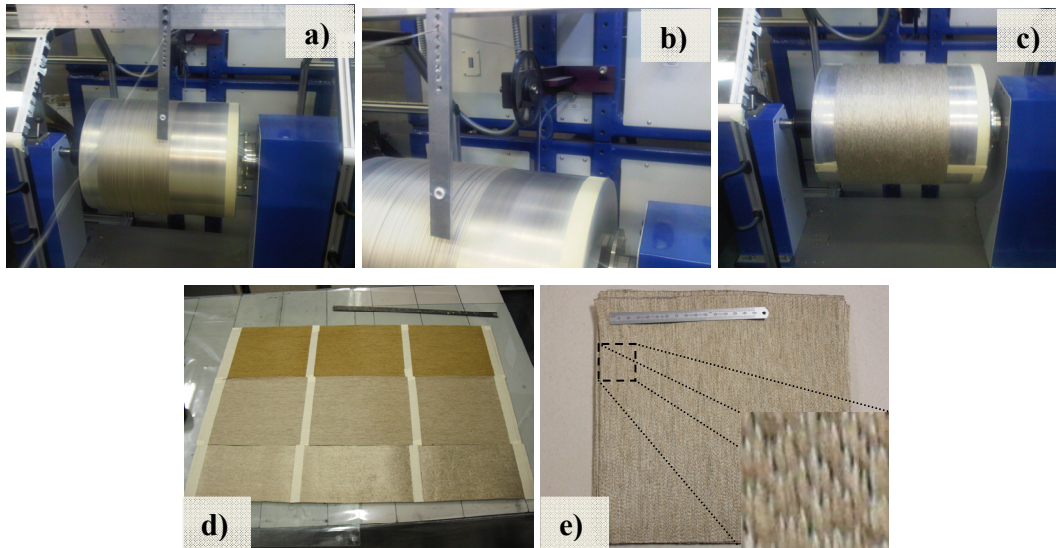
Developed unidirectional mat fabrication process: a) Automatic winding of yarn around a drum; b) close-up of yarn guide and roller; c) manual shifting of yarn (if required) to produce a completed mono-layer winding; d) recovered mat after applying HEC binding agent and drying; e) single layer mat (250×250 mm²).
